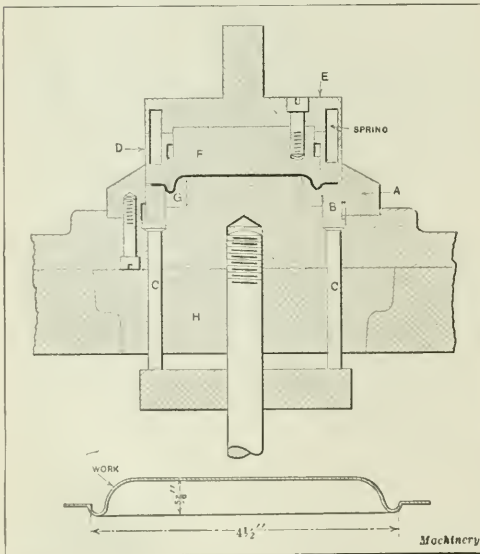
Making a Tobacco Can Cover in One Operation by Means of a Combination Blanking and Drawing Die
